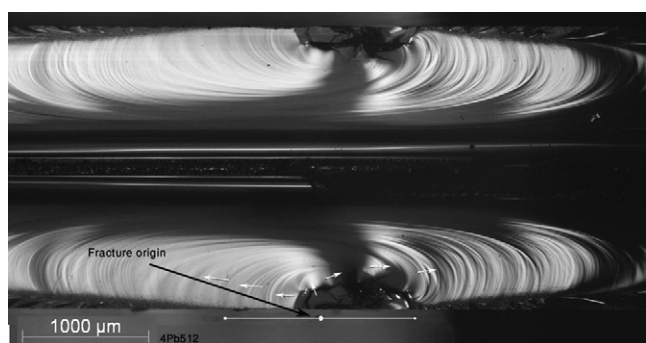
Fractography of cracked coated sample tested in 4 point bending. (a) Section view of the fracture surface.
